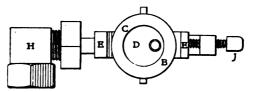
Essential Parts of Perry's Optical Indicator.
